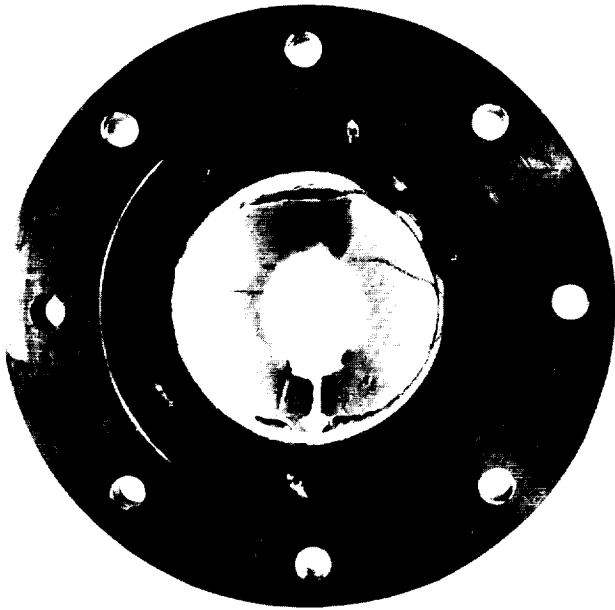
Nozzle throat after high-temperature test of hafnium-tantalum-clad insert
